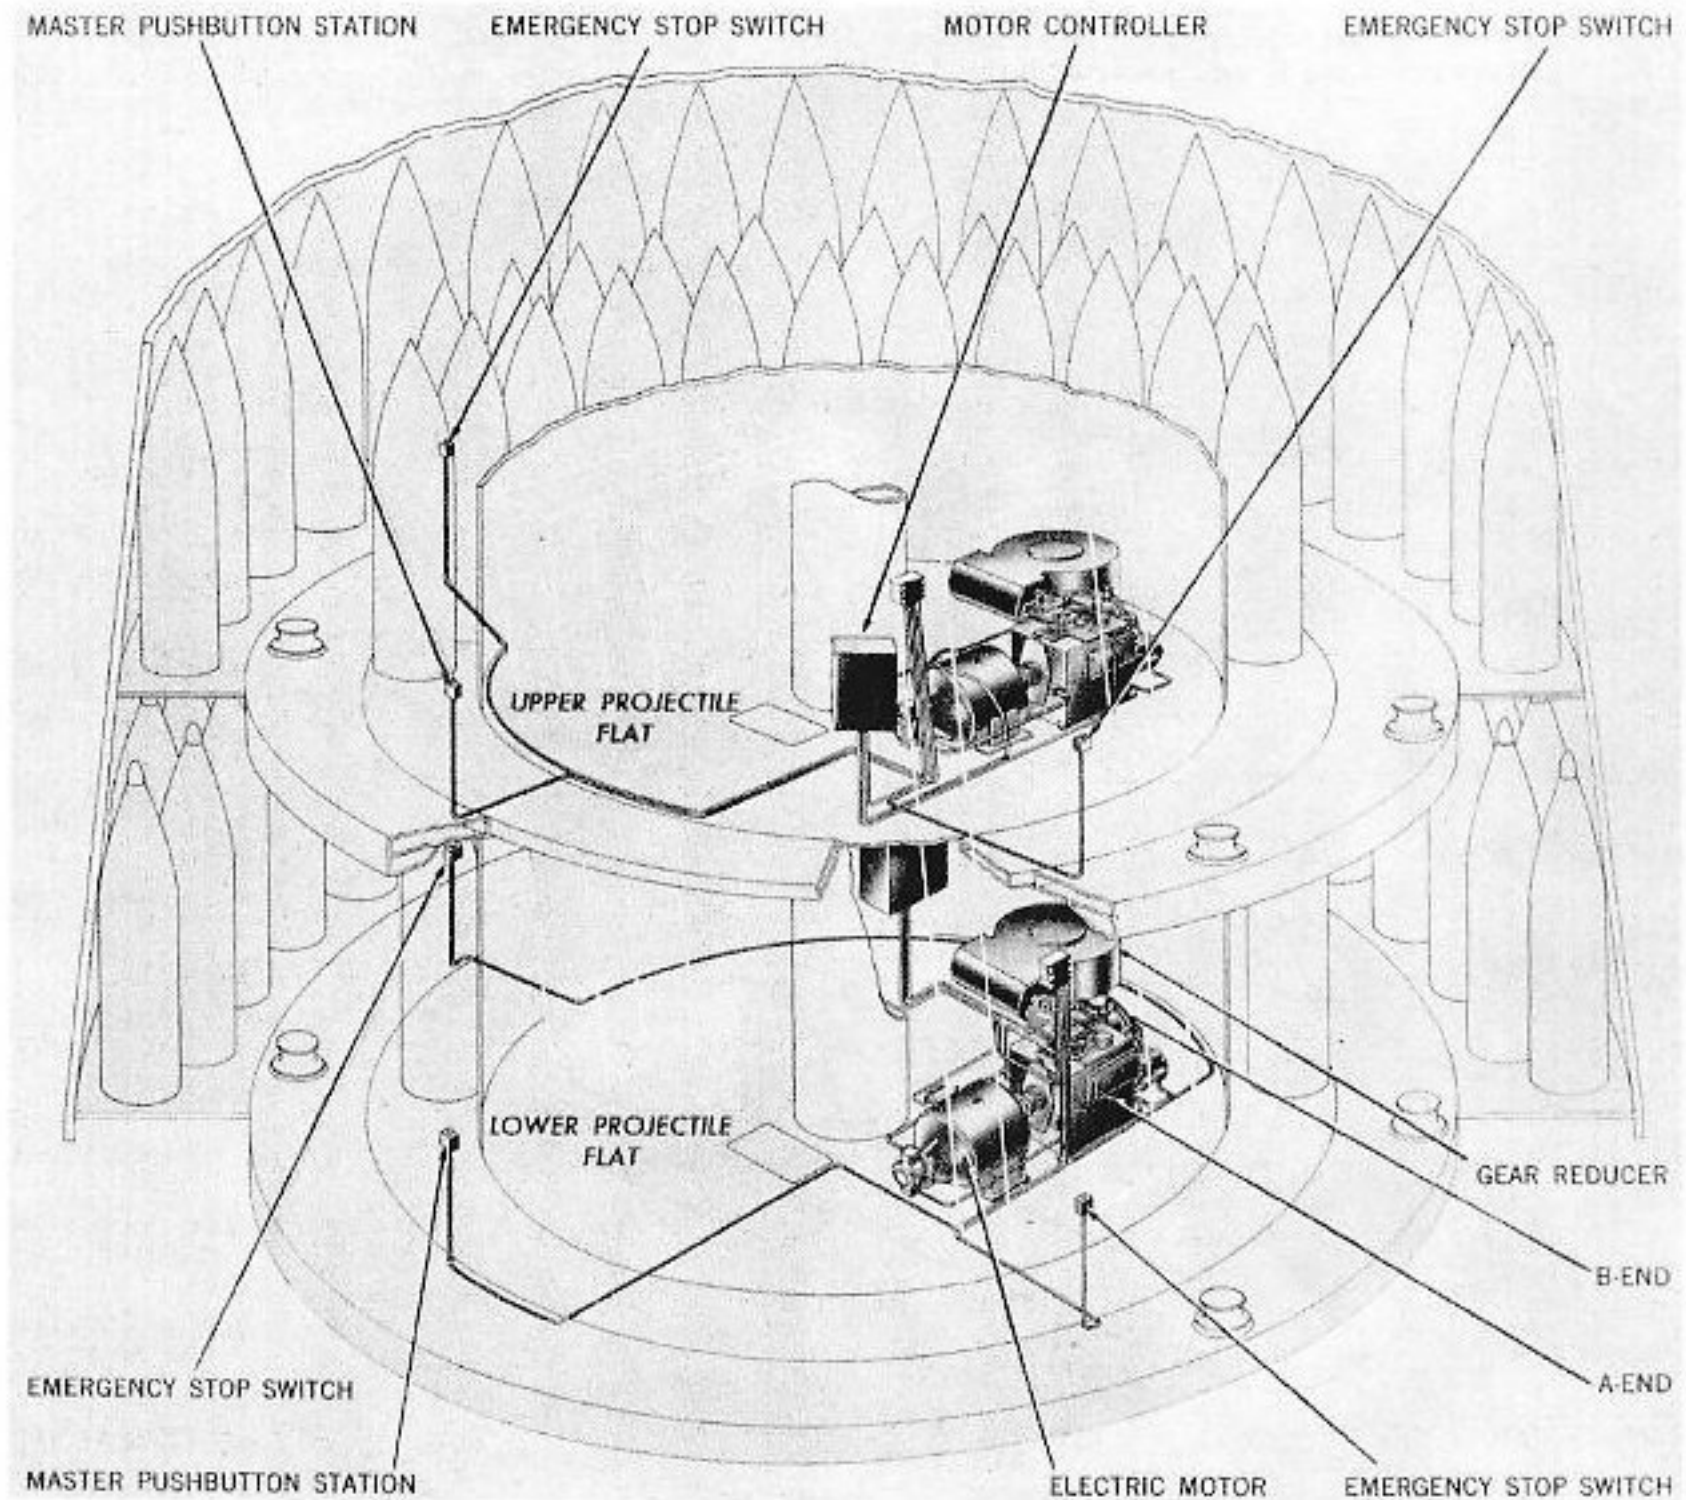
16-inch Projectile Ring Mk 2 Mod 0, Electrical Installation
